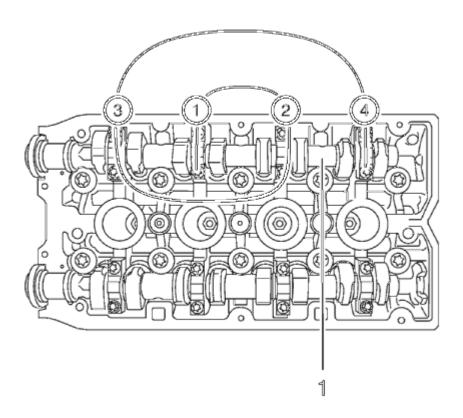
Intake Camshaft Bearing Cover Bolts Tightening Sequence Courtesy of GENERAL MOTORS COMPANY
